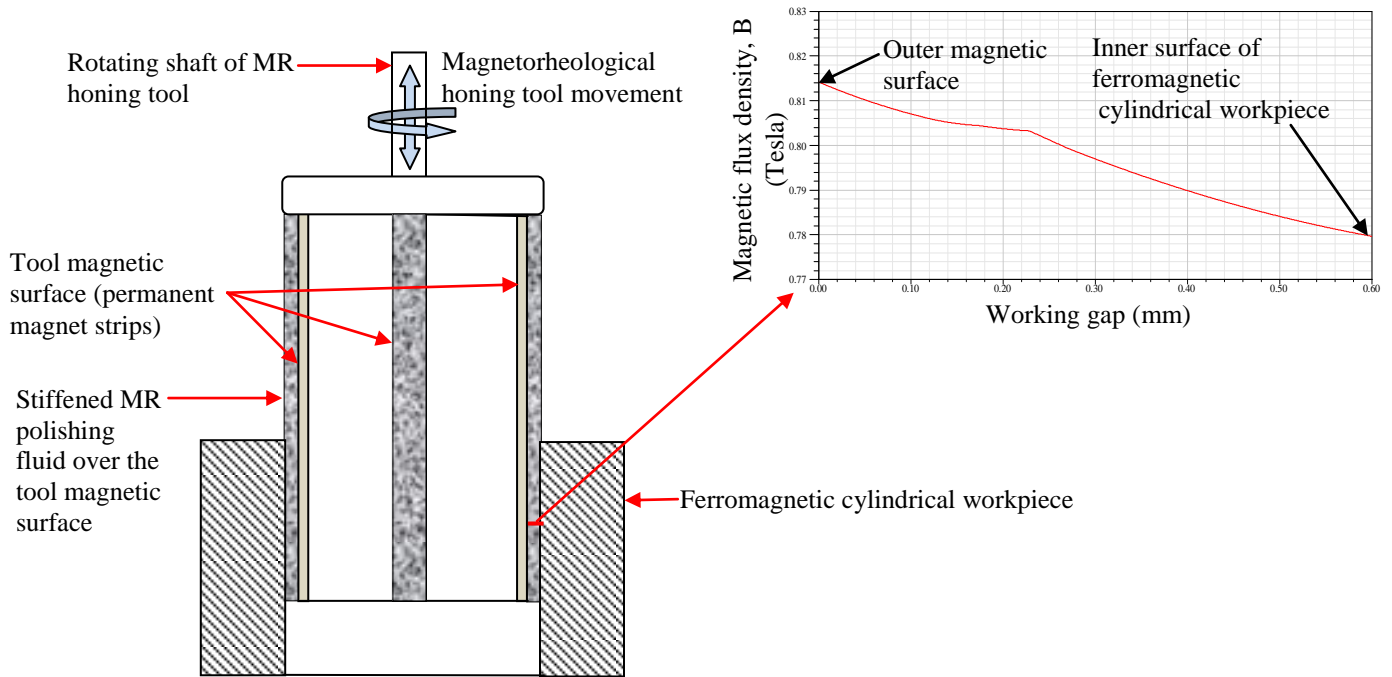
Schematic diagram of the proposed magnetorheological honing tool to perform finishing on the inner surface of the ferromagnetic cylindrical workpiece.
